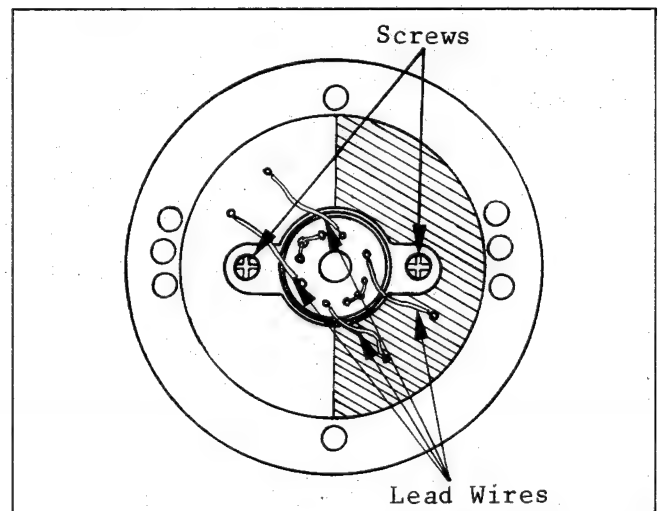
Replacement of Upper Cylinder Unit-(1)
